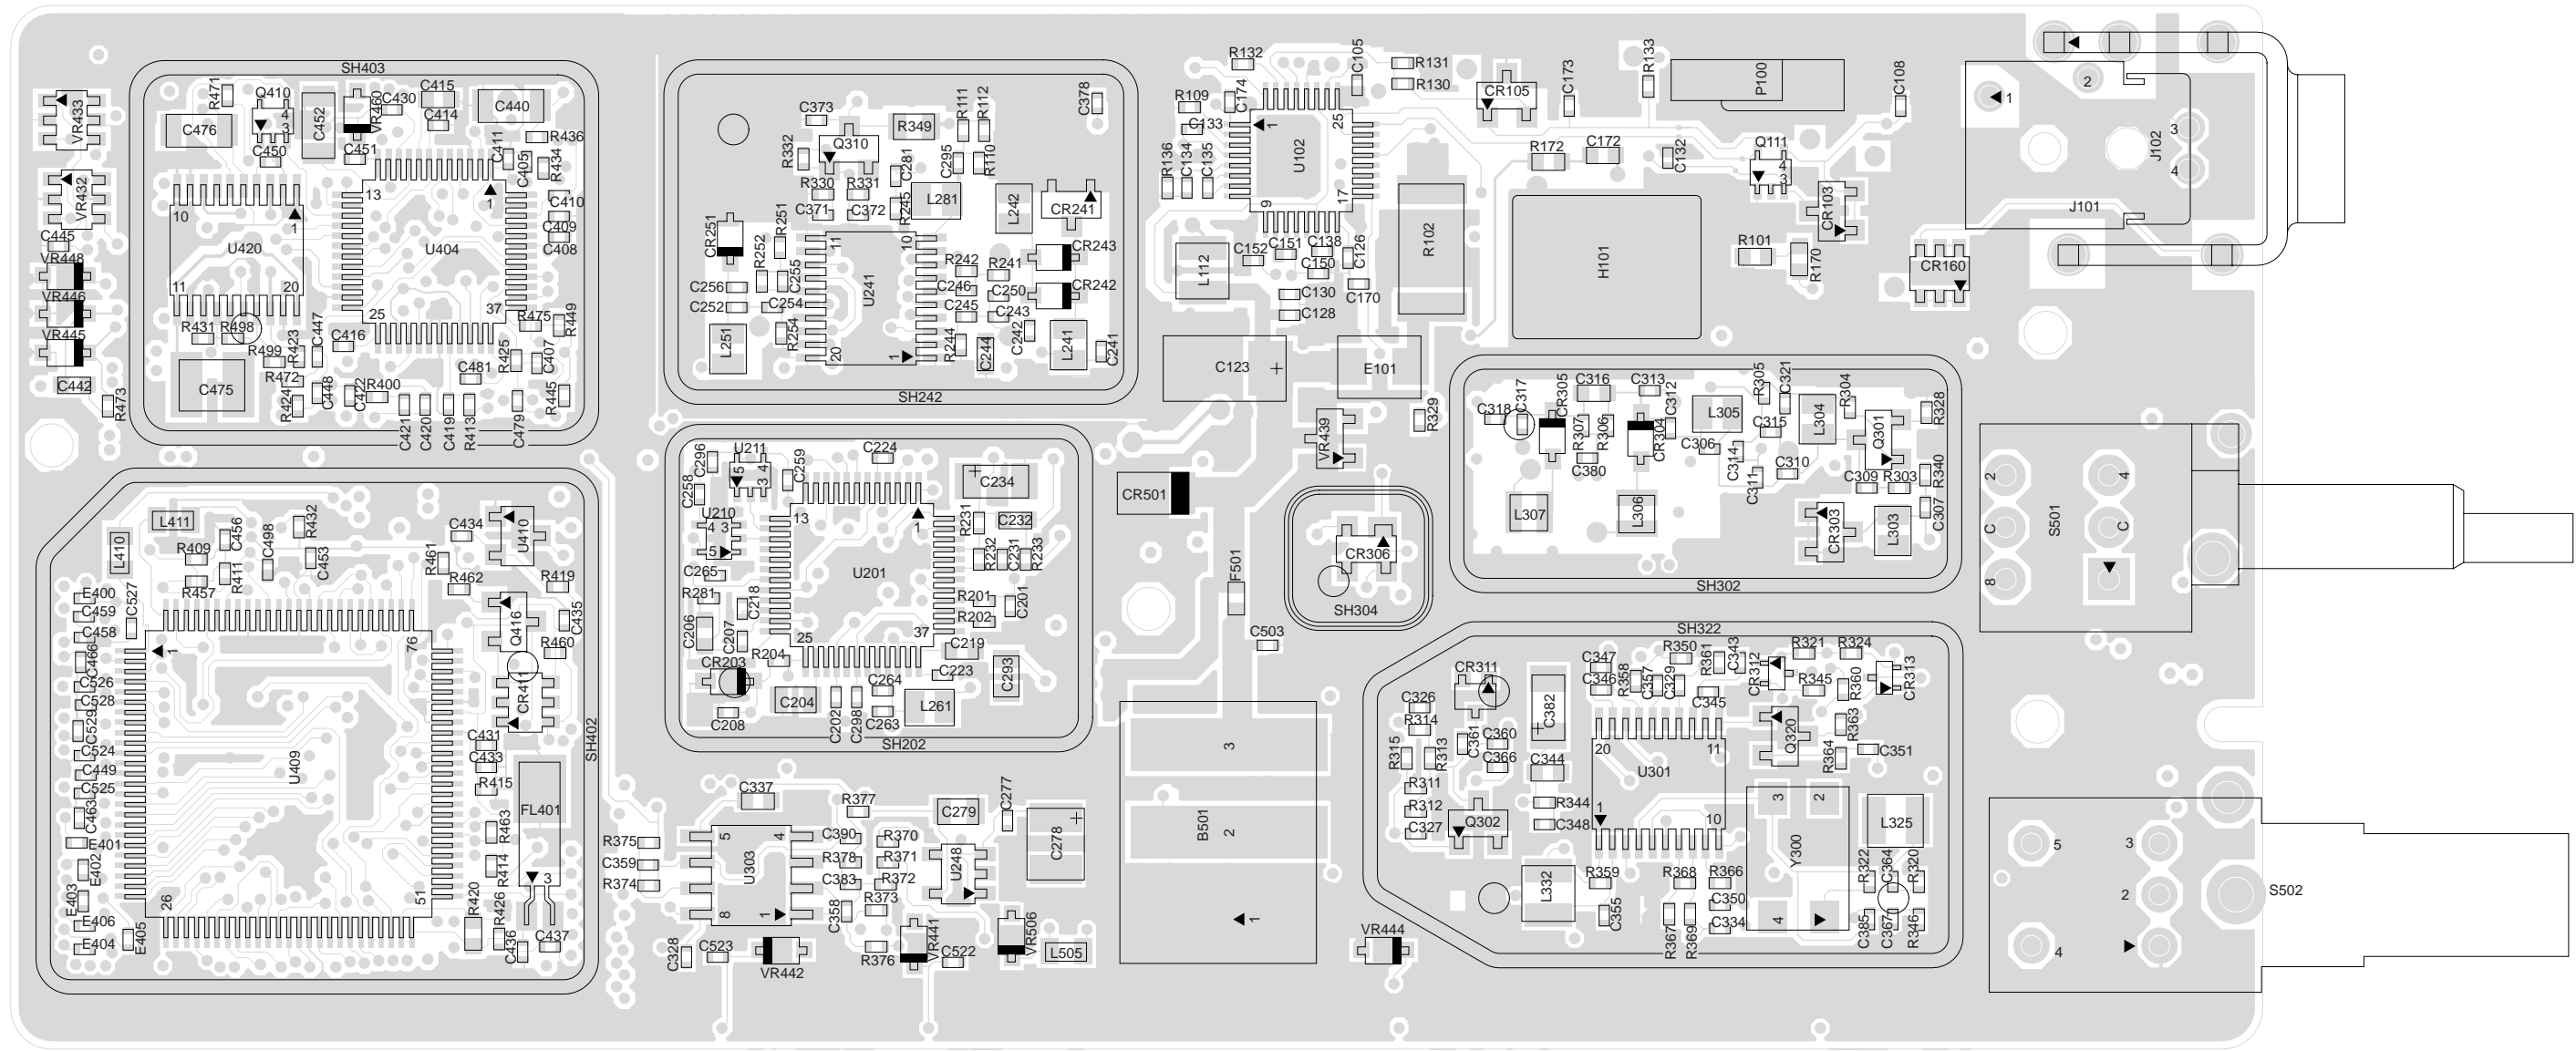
UHF (450-527 MHz) 5000/7000 Series Main Board Bottom Side PCB No. 8486686Z02
